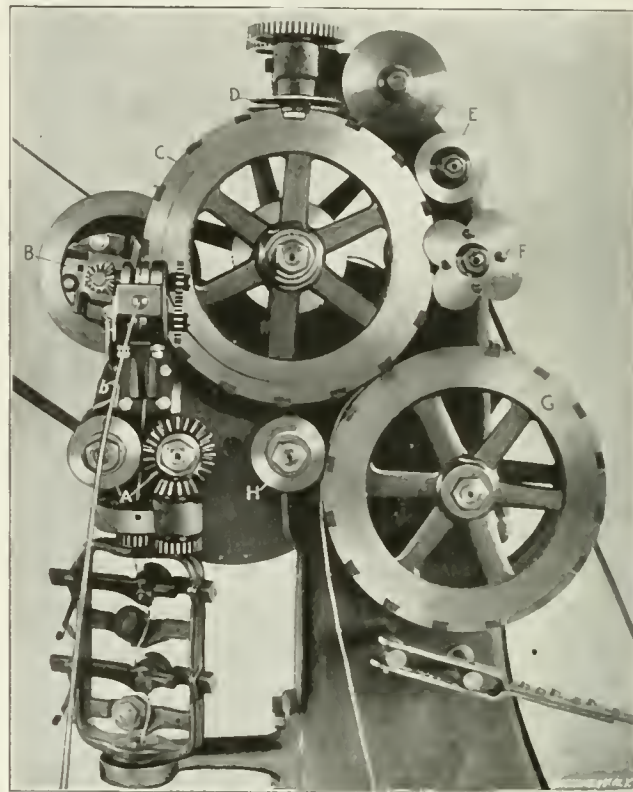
Enlarged View of Mechanism for Cutting, Forming and Attaching Barbs to Single Strand of Wire
